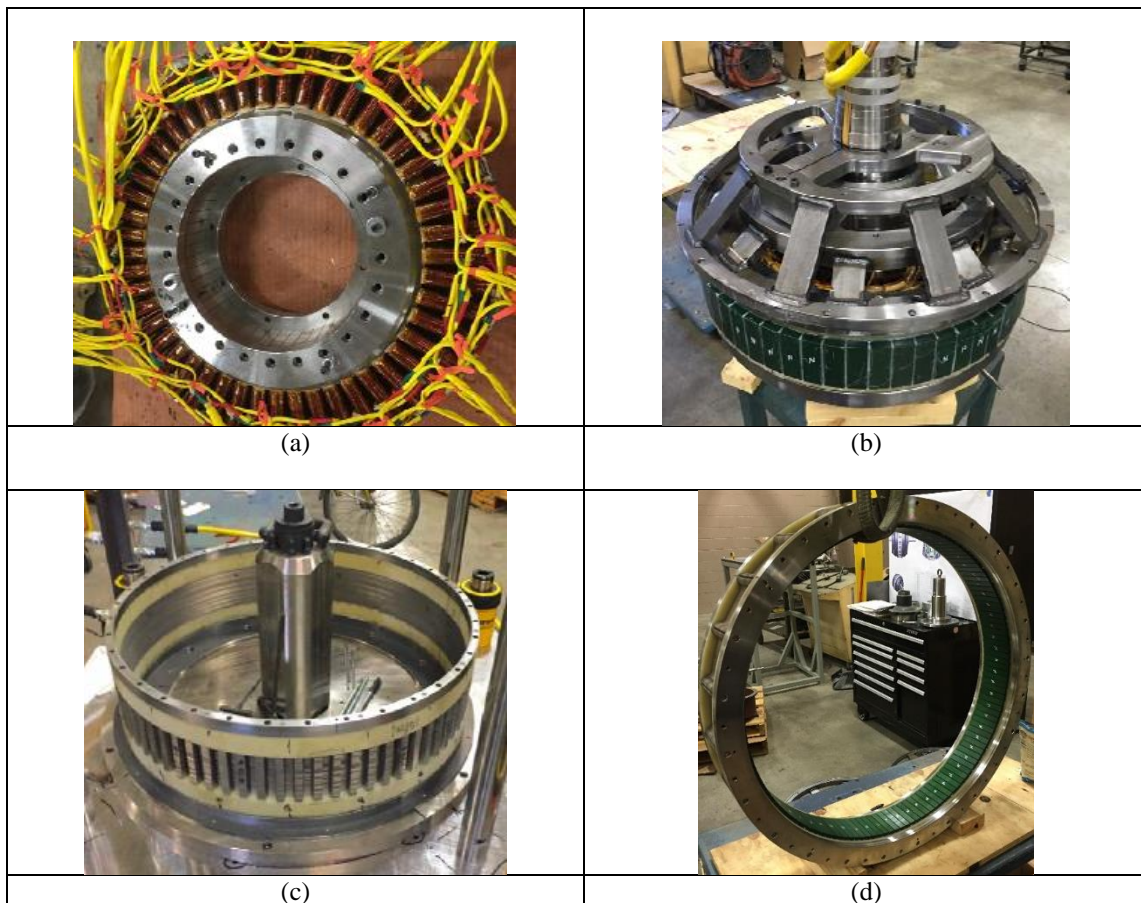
RFMGM Prototype (a) Stator, (b) High Speed Rotor, (c) Modulator Assembly, and (d) Low Speed Rotor
